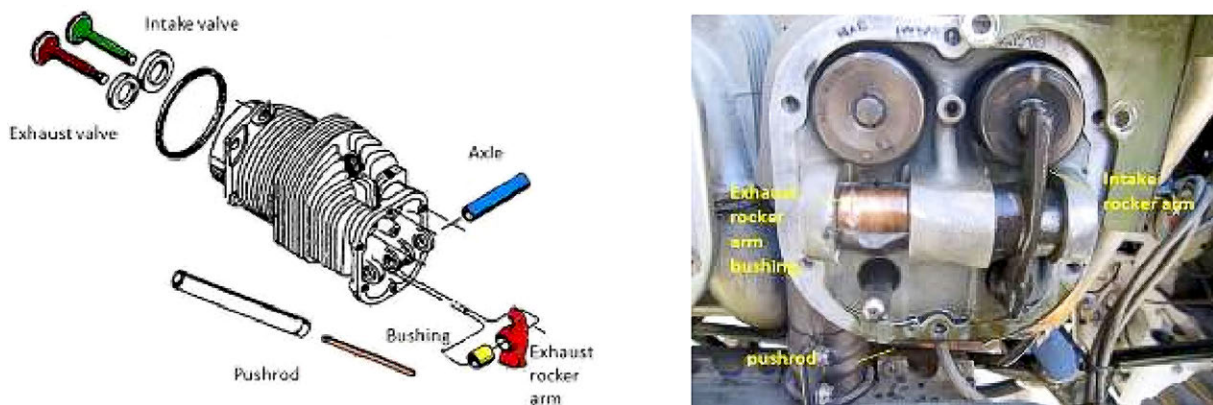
Simplified view of a cylinder with the rocker arm and head of the no. 2 cylinder
